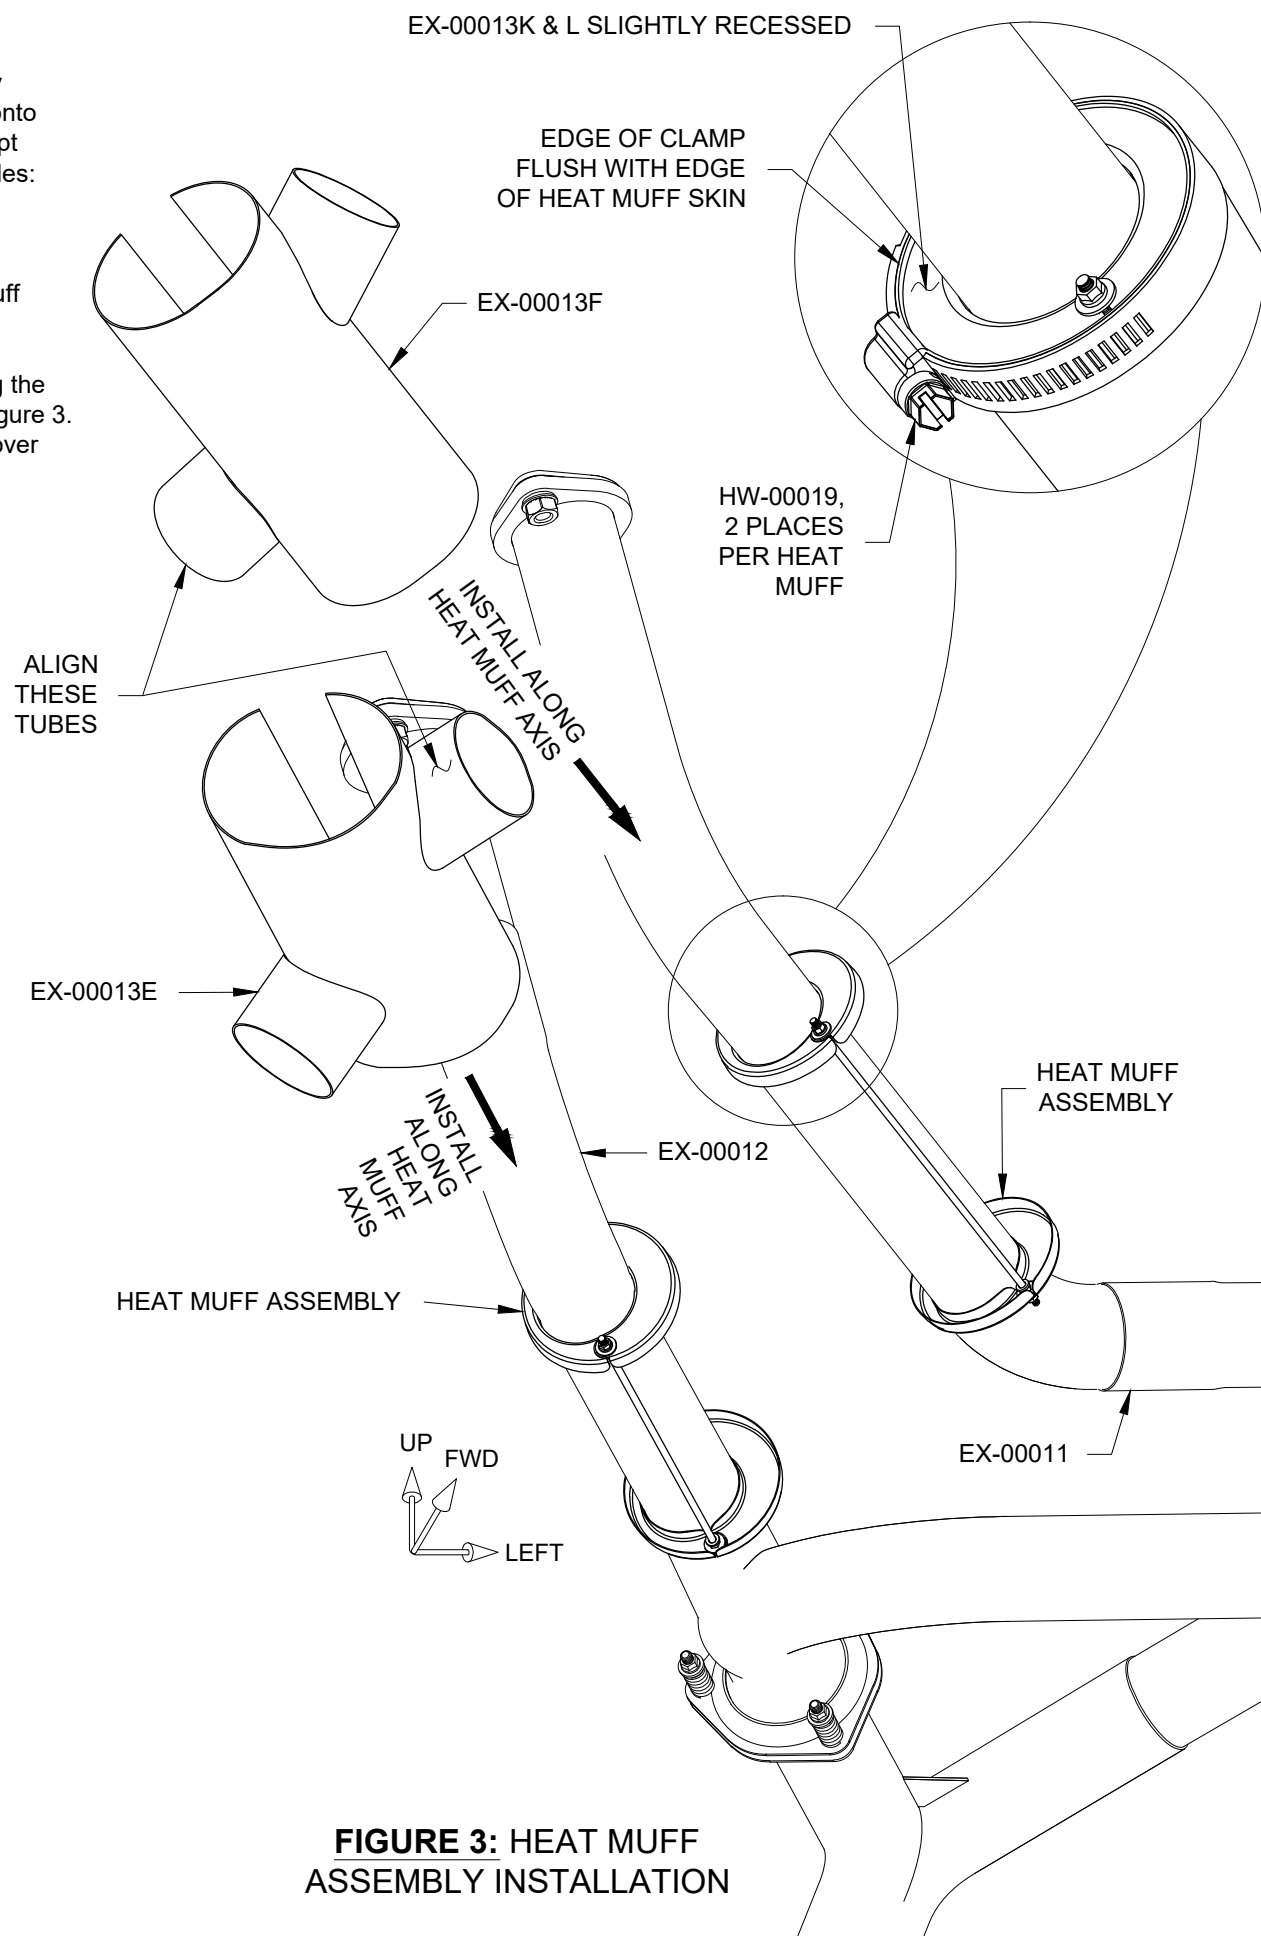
HEAT MUFF ASSEMBLY INSTALLATION
